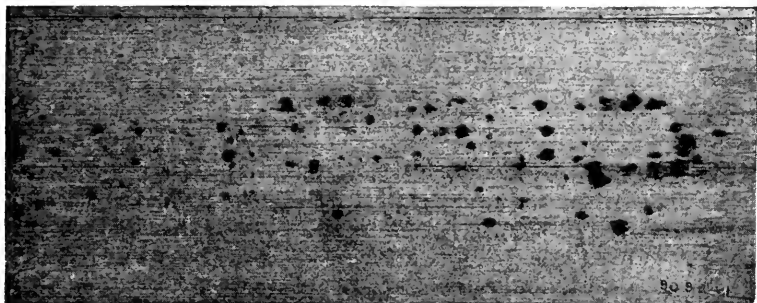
ETCHED HORIZONTAL SECTION AT END OF RAIL 9098-1.
